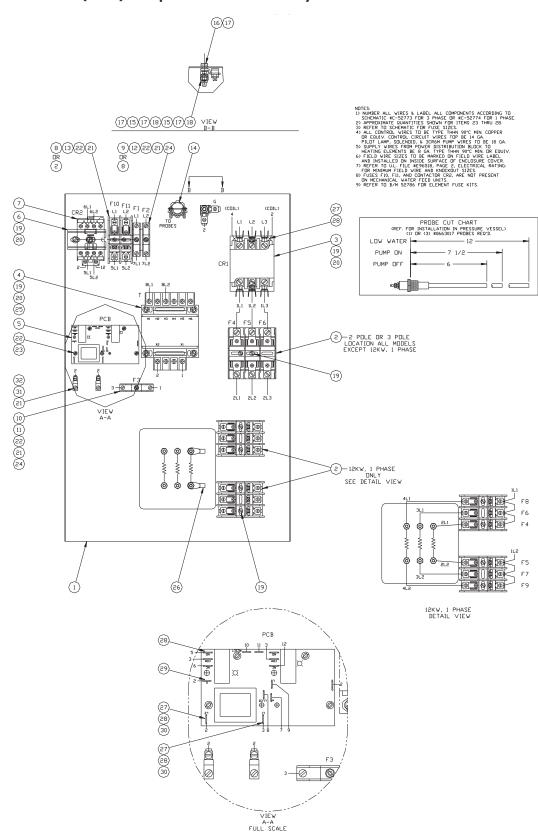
75384 (rev B) Component Panel Assembly Hoffman Steam Generator
